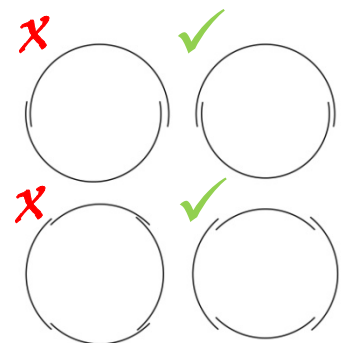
WELDING ARRANGEMENTS TO ASSURE AIR-TIGHTNESS
